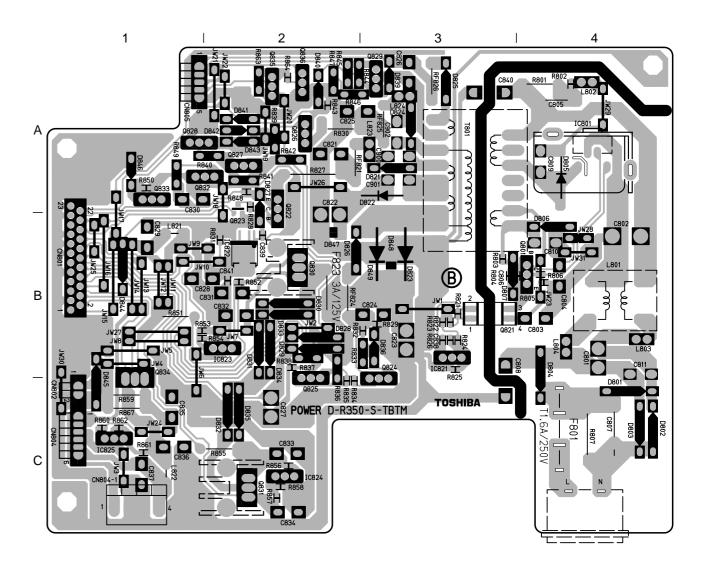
EU02 Power Supply PC Board (Top side)
